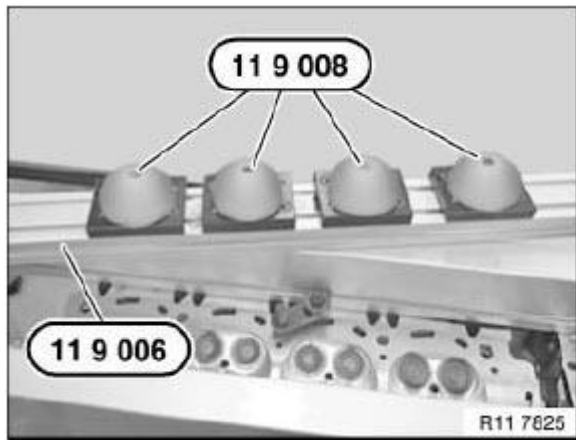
Identifying Special Tool (11 9 008 And 11 9 006)
